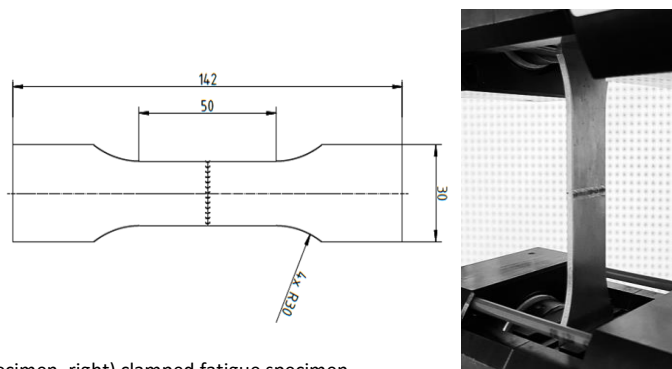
Left) fatigue test specimen, right) clamped fatigue specimen
